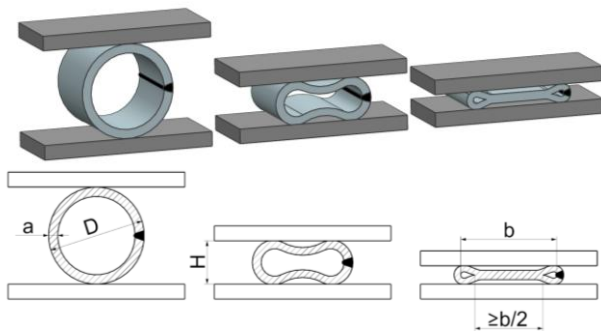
Metallic materials – Tube – Flattening test as per EN ISO 8492:2004 , H – flattening parameter = 66% x A for parent material or 70% x A for welded joint of the tube
